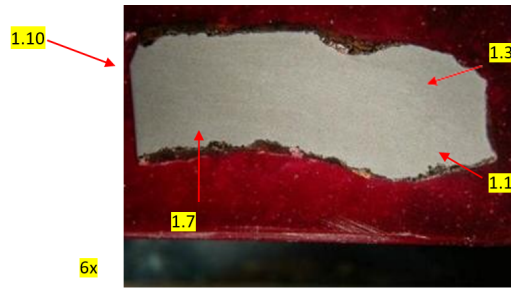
Photomicrographic Location of Spring A, Fracture Surface with Longitudinal Sections.
